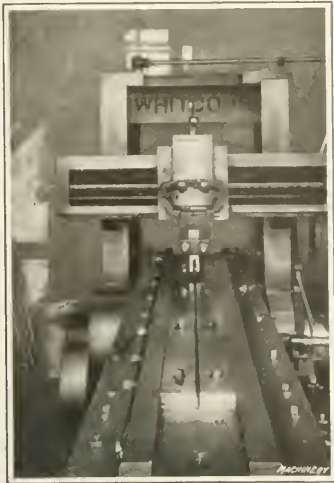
Rolling In Drill Shank Groove on Planer with Special Fixture
